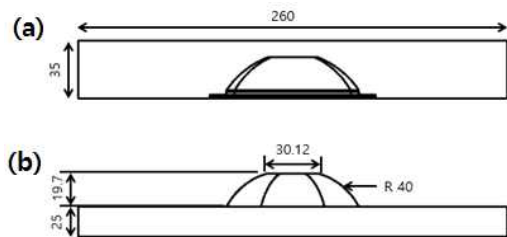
Schematics of film thermoforming mold: (a) upper mold, (b) lower mold
